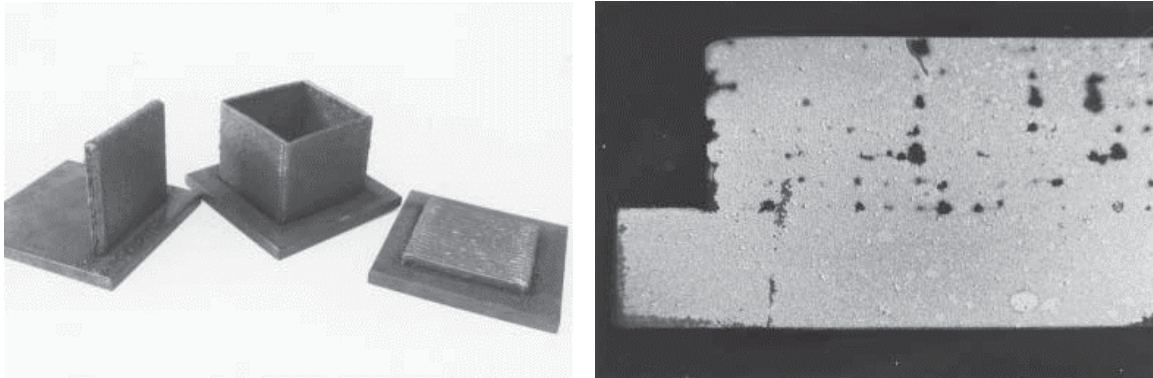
Deposited Metal Receptacle Made by manual welding process (Baker 1920)
